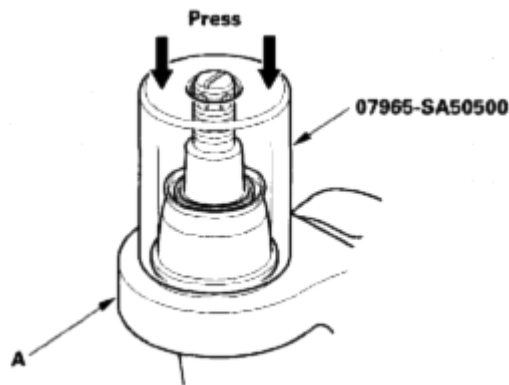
Pressing Boot With Hub Dis/Assembly Tool
